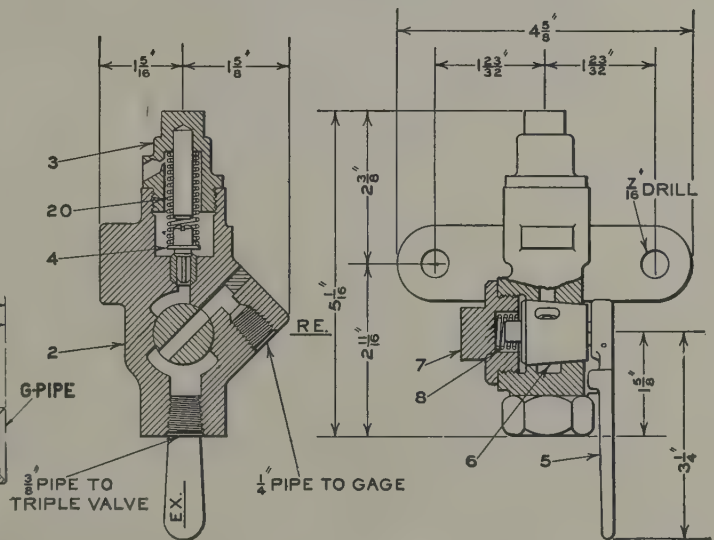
Single-Pressure Retaining Valve, Spring Type.
